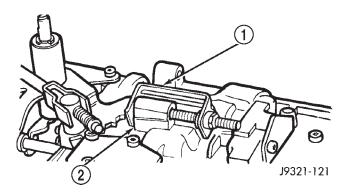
Securing Detent Ball And Spring With Retainer Tool
